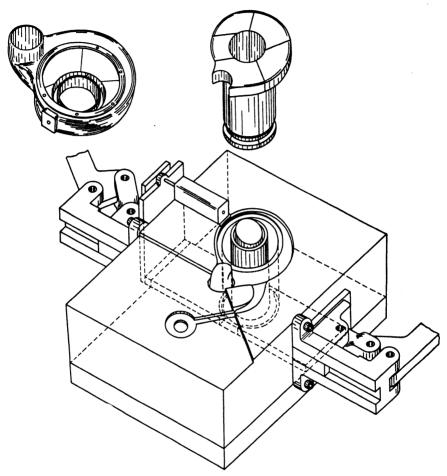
Die having five loose pieces that are ejected along with the part at the end of the casting cycle. The slides lock the loose pieces in place.
